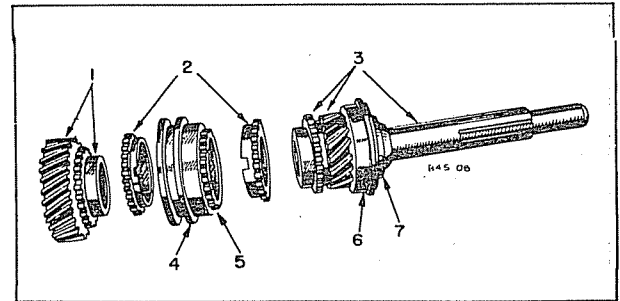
Transmission Synchroniser and Second Speed Gear Assembly (Refer to Fig. 1).
